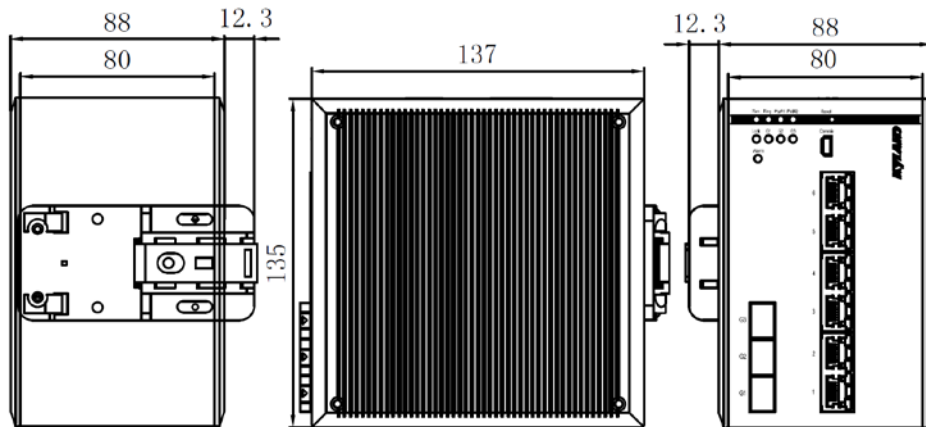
Dimensions for Horizontal DIN Rail Mounting
